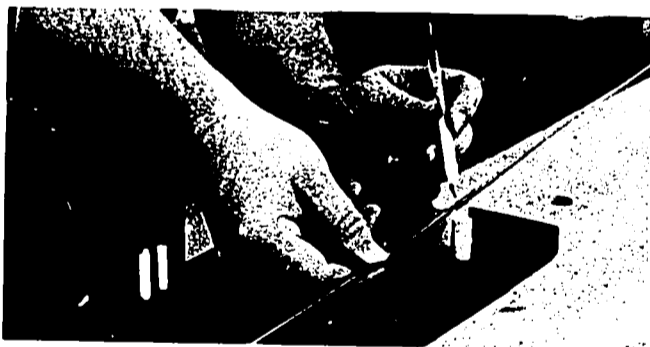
B-3. Positioning 14" Mark in No. 7-1 Fixture
